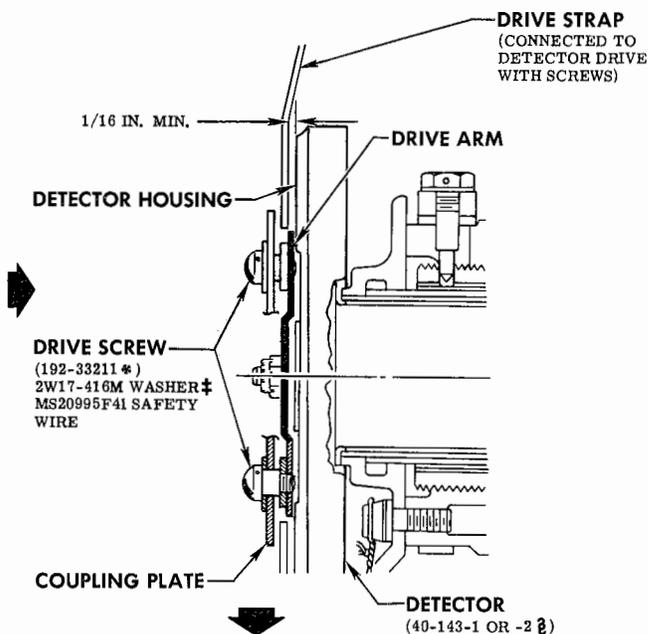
Installing General Main Gear Wheel and Brake Assembly (Sheet 4 of 5)
